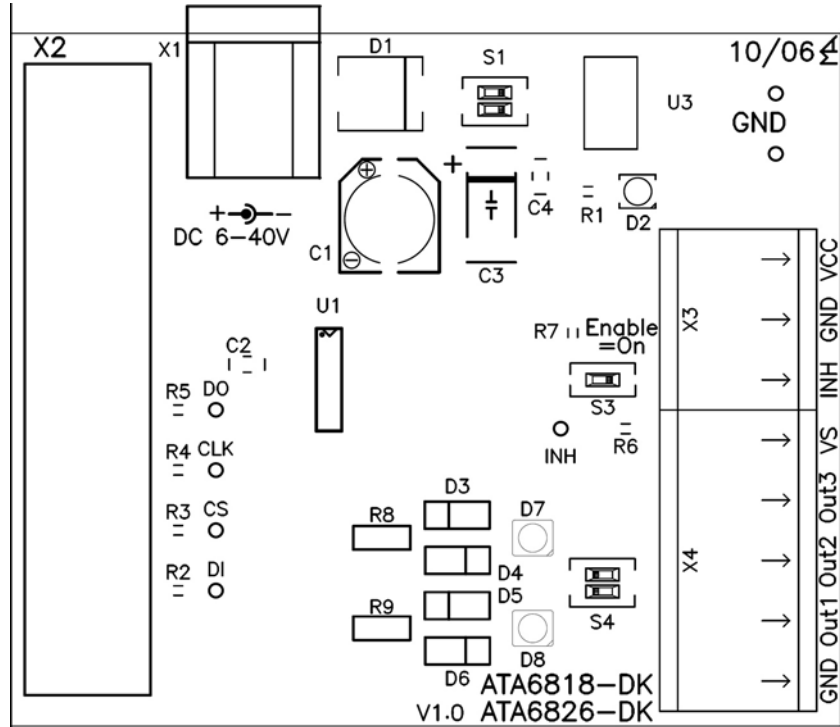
ATA6826-DK Design Kit, Basic Application Board Top Side, Top View
